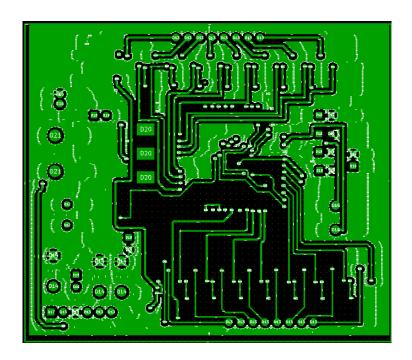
Back Layer of PCB Design Using Microcontroller PIC18F4550
